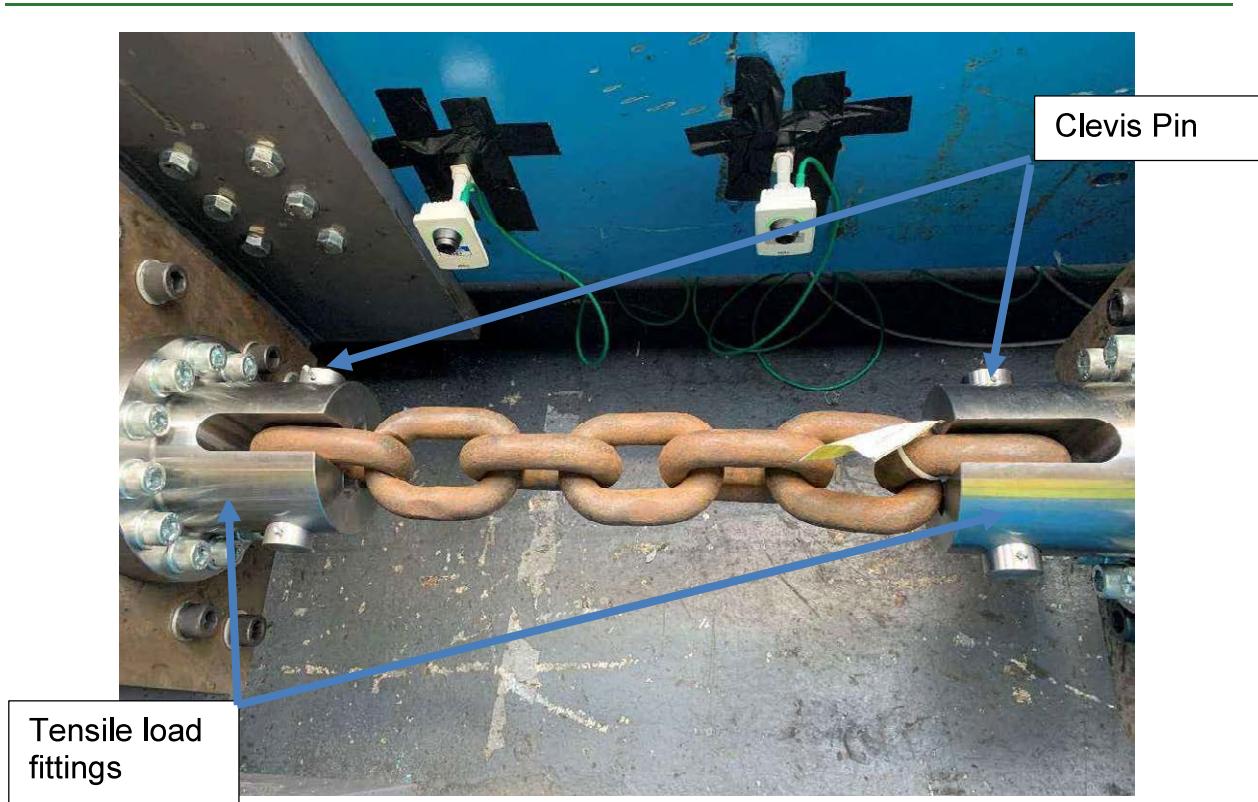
Sample 23310 loaded into tensile testing equipment fixtures and clevis pins identified
